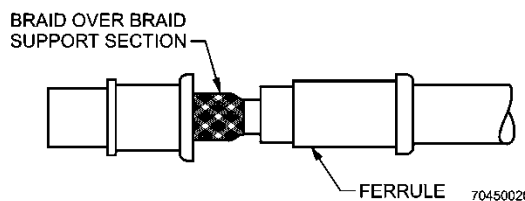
Crimped Centre Contact of Braided Coaxial Cable Inserted in Contact Body
